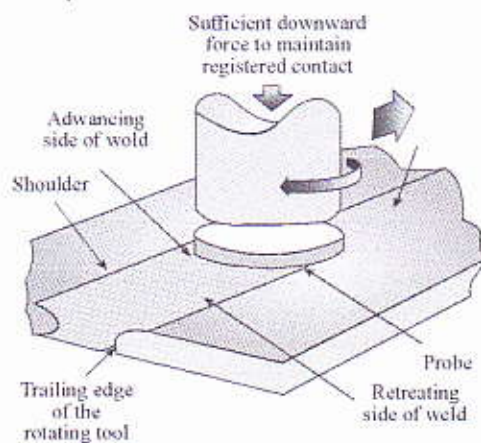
Friction stir welding process [1, 2, 3]
